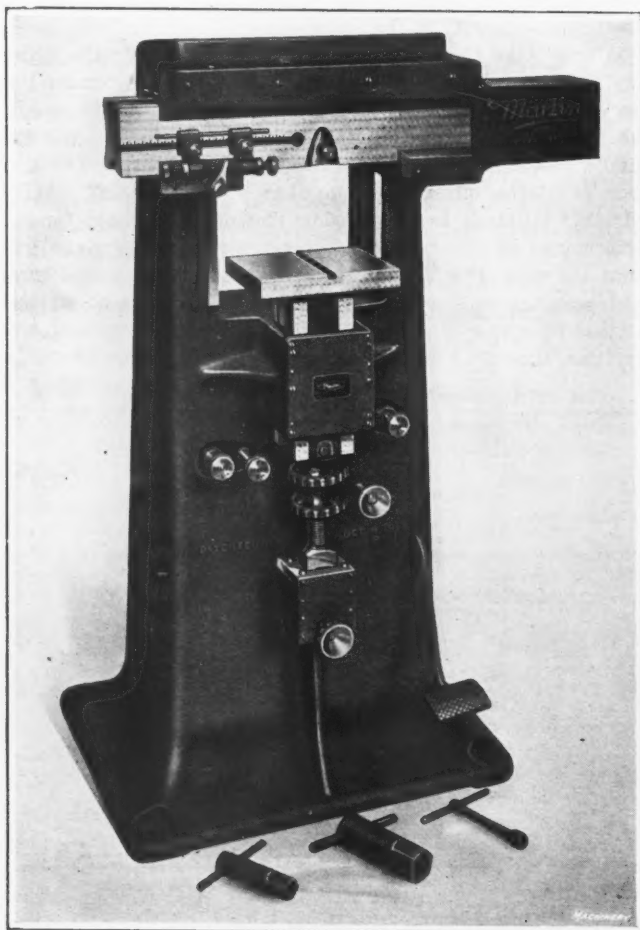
Martin Hydraulic Machine for marking Shells and Other Metal Products by Impression Method
